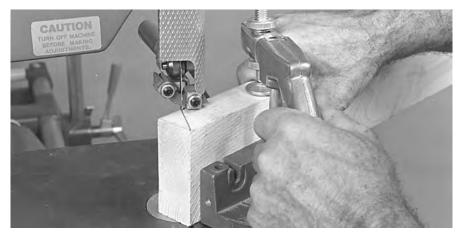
By mounting the miter gauge in the table slot that runs parallel to the flat of the blade, you can crosscut and miter.
